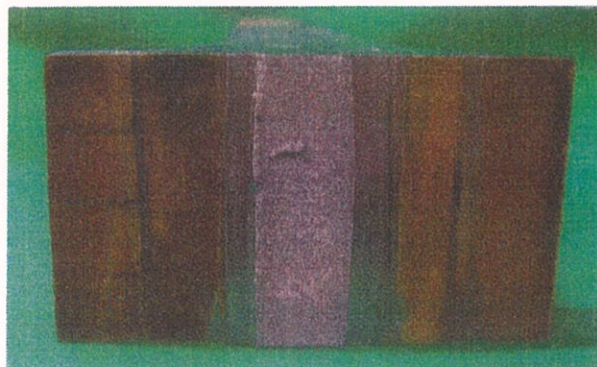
Fracture surface after tensile fracture toughness test (TCI-5, -166°C)
